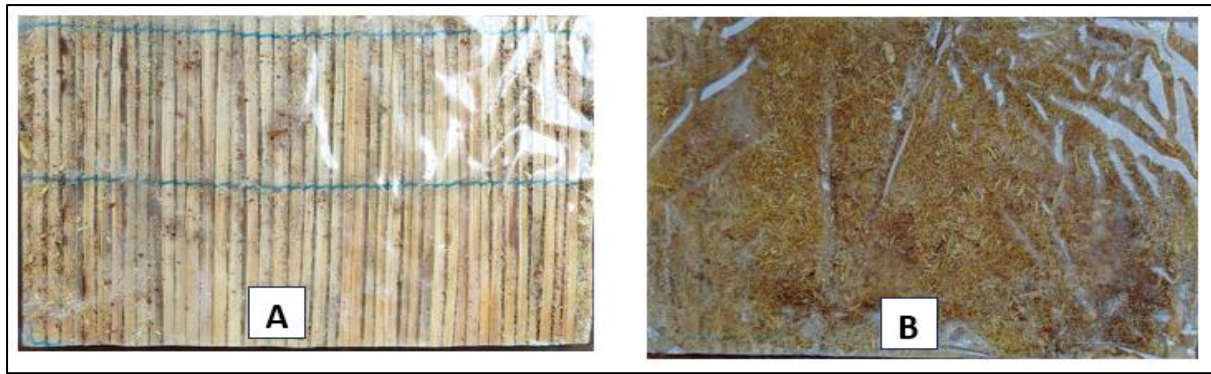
Fabricated Specimen using hand lay-up technique A) Front side of the Specimen B) Backside of the Specimen
